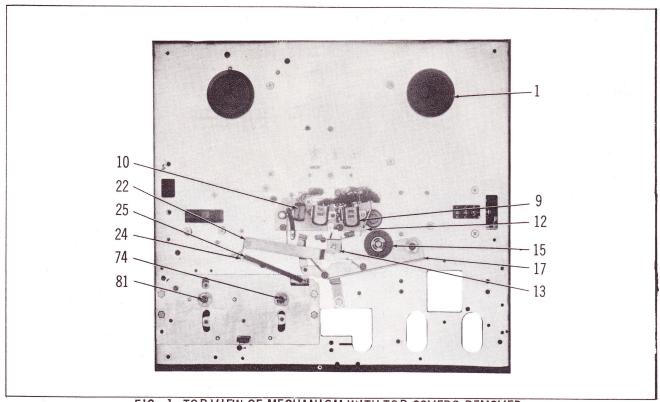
TOP VIEW OF MECHANISM WITH TOP COVERS REMOVED
